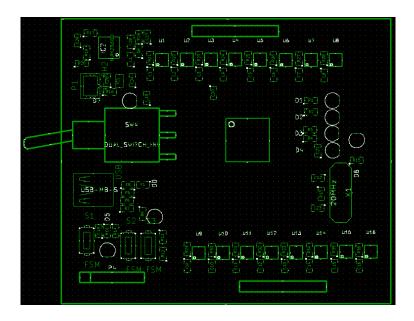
Silk Document of PCB Design Using Microcontroller PIC18F4550
